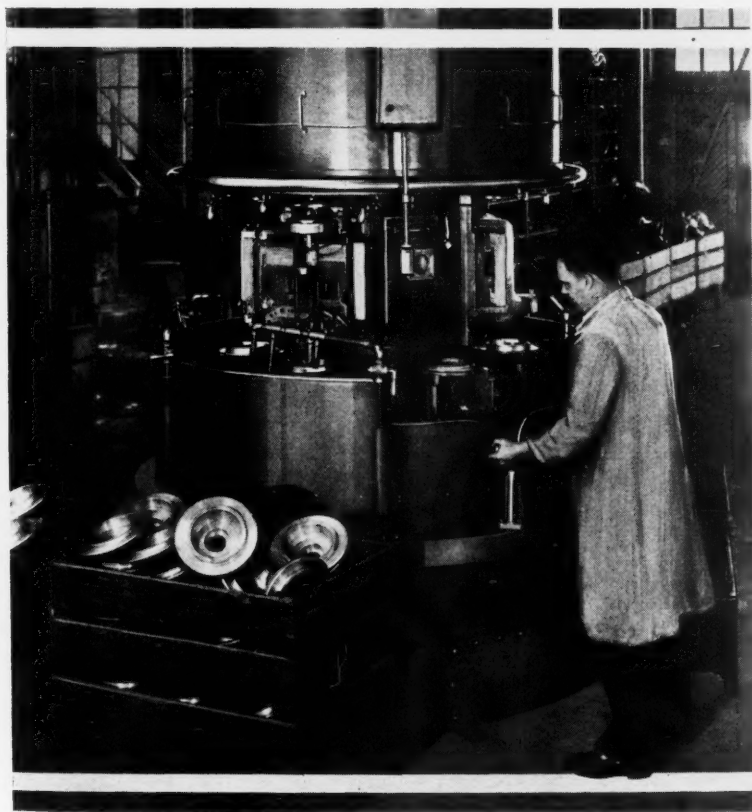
A Bullard Mult-Au-Matic Engaged in Machining a Flange with a Very High Degree of Accuracy, Necessitated by the Close Fit Required for the Mating Piece. One of the Surfaces is an Accurately Produced Spherical Shape
